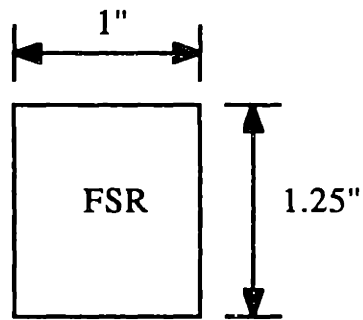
Side View of the Hole for the Peg-In-Hole Experiments with a Four Sided Hole
